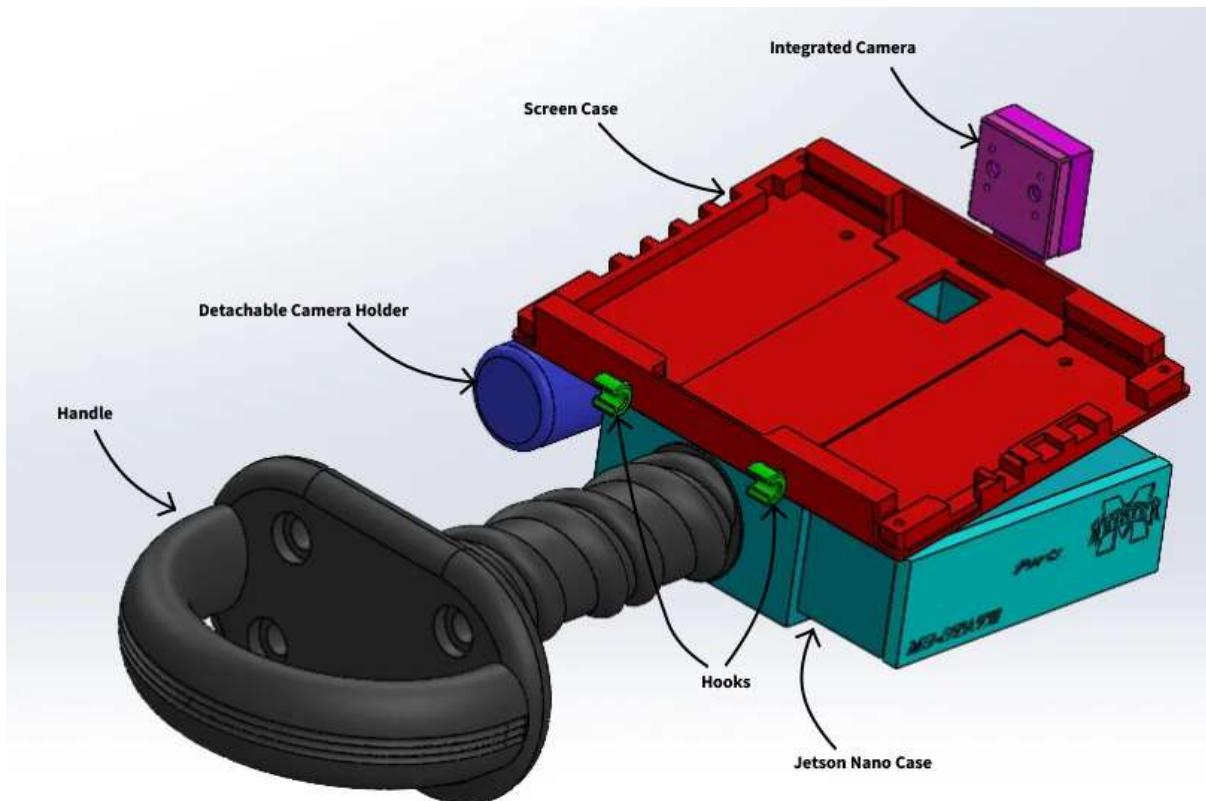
Final Assembled Design of Product in Isometric view in SOLIDWORKS
